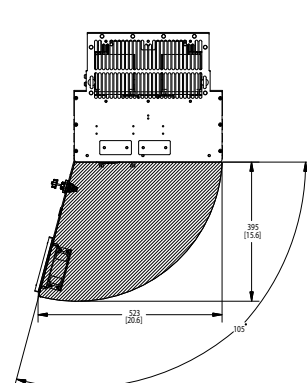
Front Clearance of IP21/IP54 Enclosure Type, Frame Size D2h.
